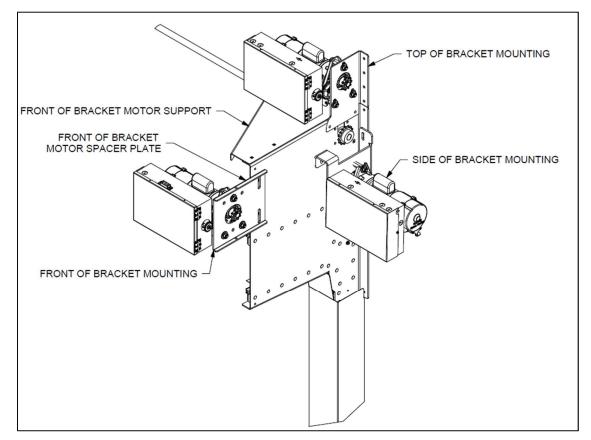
MOUNTING CONFIGURATIONS (RIGHT-HAND MOUNT SHOWN)
